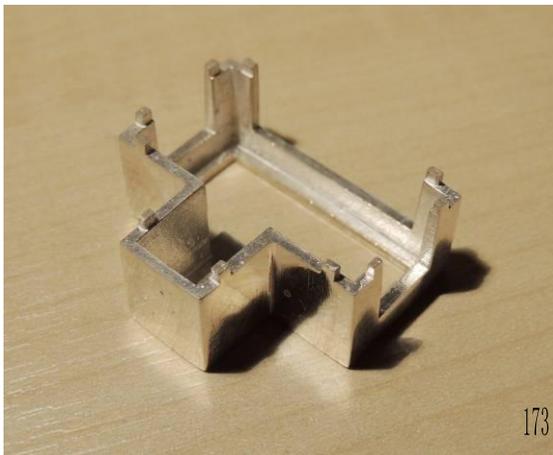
The traditional claw setting of 'Tu 凸' ring silver parts (Jiang, 2012).
